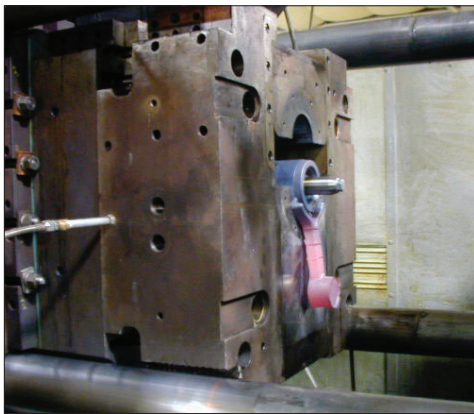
Die cast copper rotor about to be ejected from the center platen portion of the 750 ton machine.
